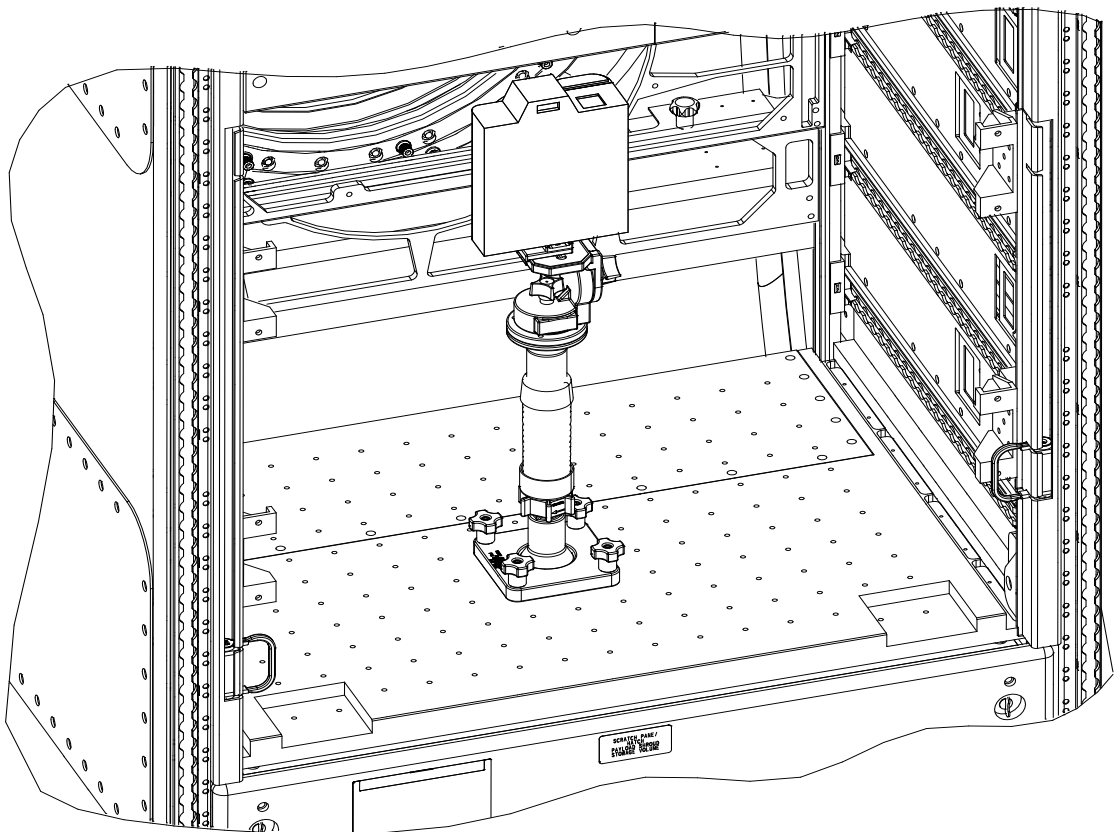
SMALL CAMERA BRACKET (PAGE 1 OF 3)
